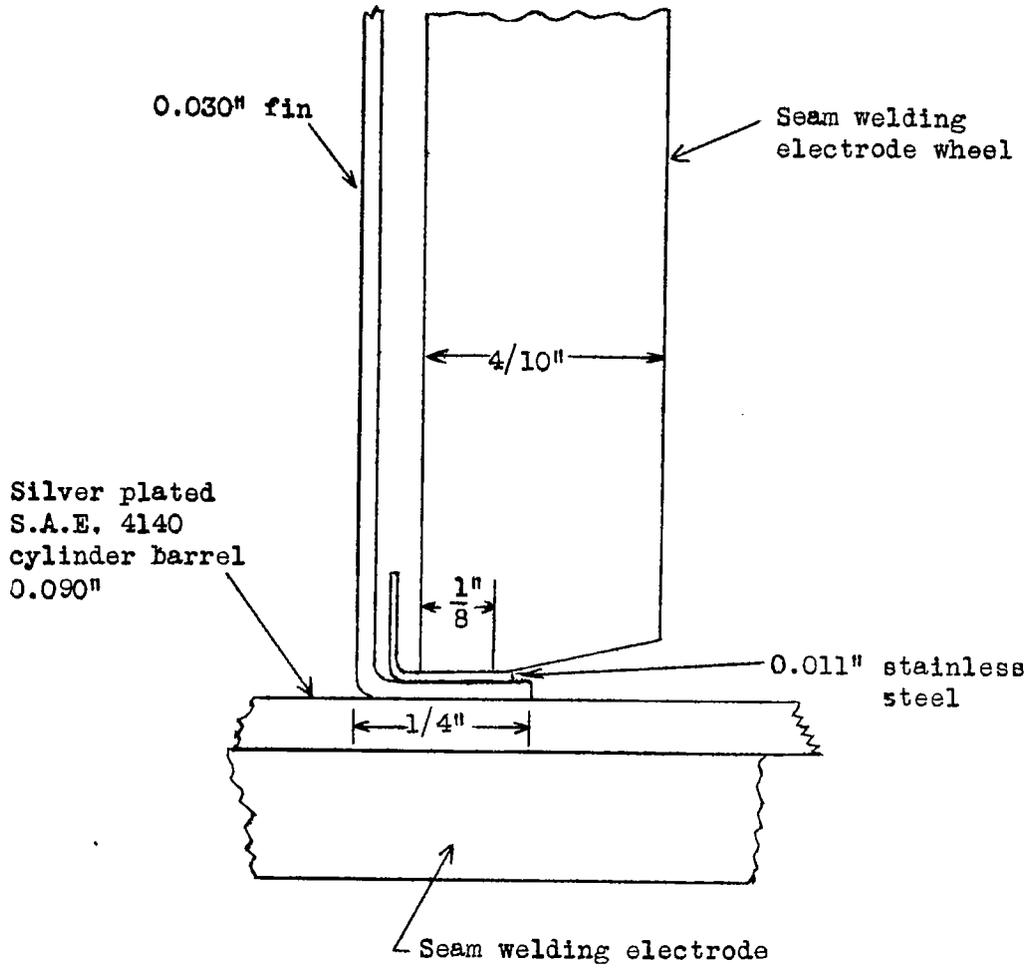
Seam welding of fins to S.A.E. 4140 cylinder barrel.
